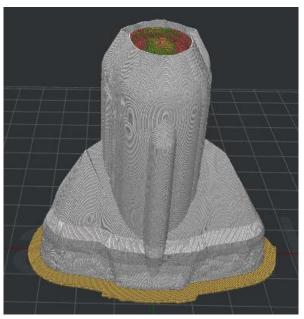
Set "Wipe Wall Type" to be "WaterFall".
